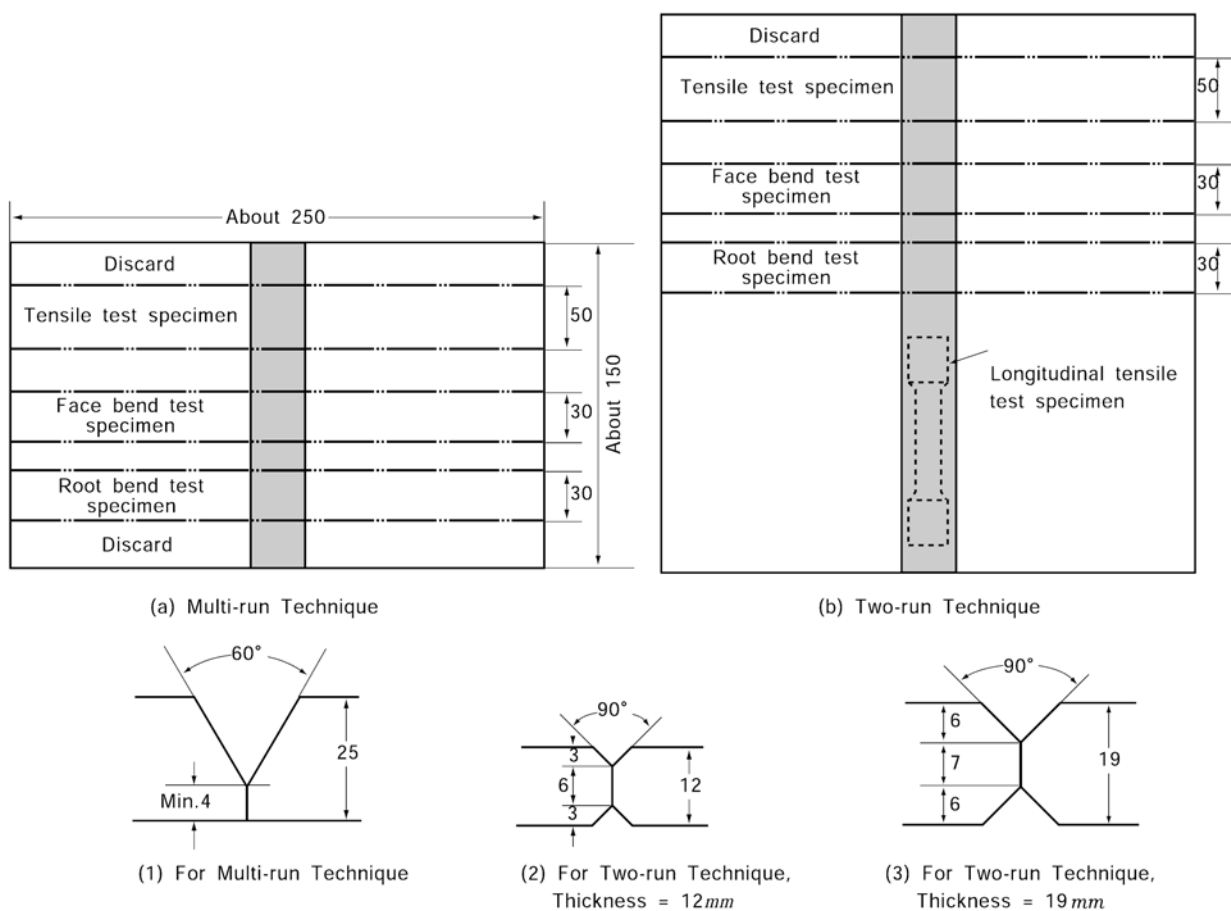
Butt Weld Test Assembly for Stainless Steel (Submerged arc welding, Unit : mm)
